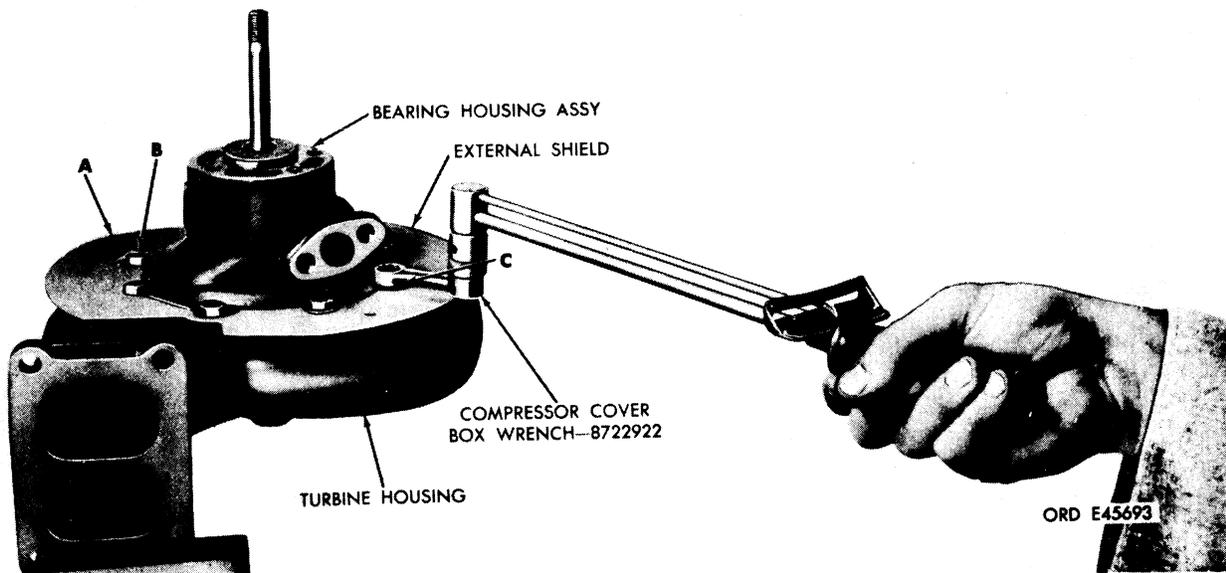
SECURING BEARING HOUSING AND EXTERNAL SHIELD ON TURBINE HOUSING - TURBOCHARGERS 7748900 AND 10935279.
